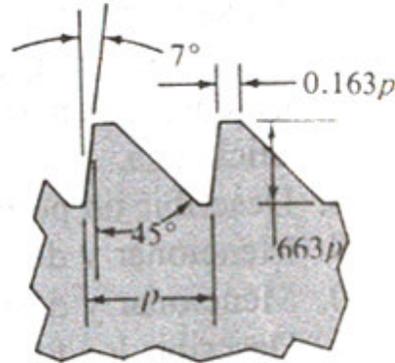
Buttress Thread (Ref.: ANSI B1.9-1973)
